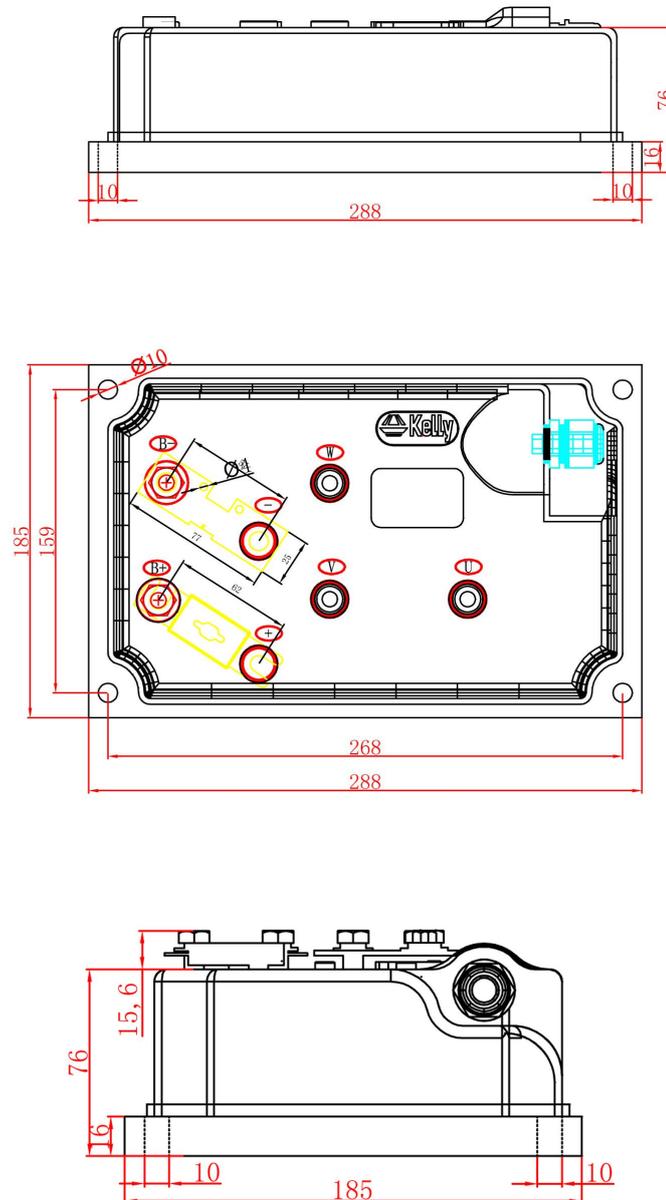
KLS8080I/IPS mounting holes' dimensions (dimensions in millimeters)
